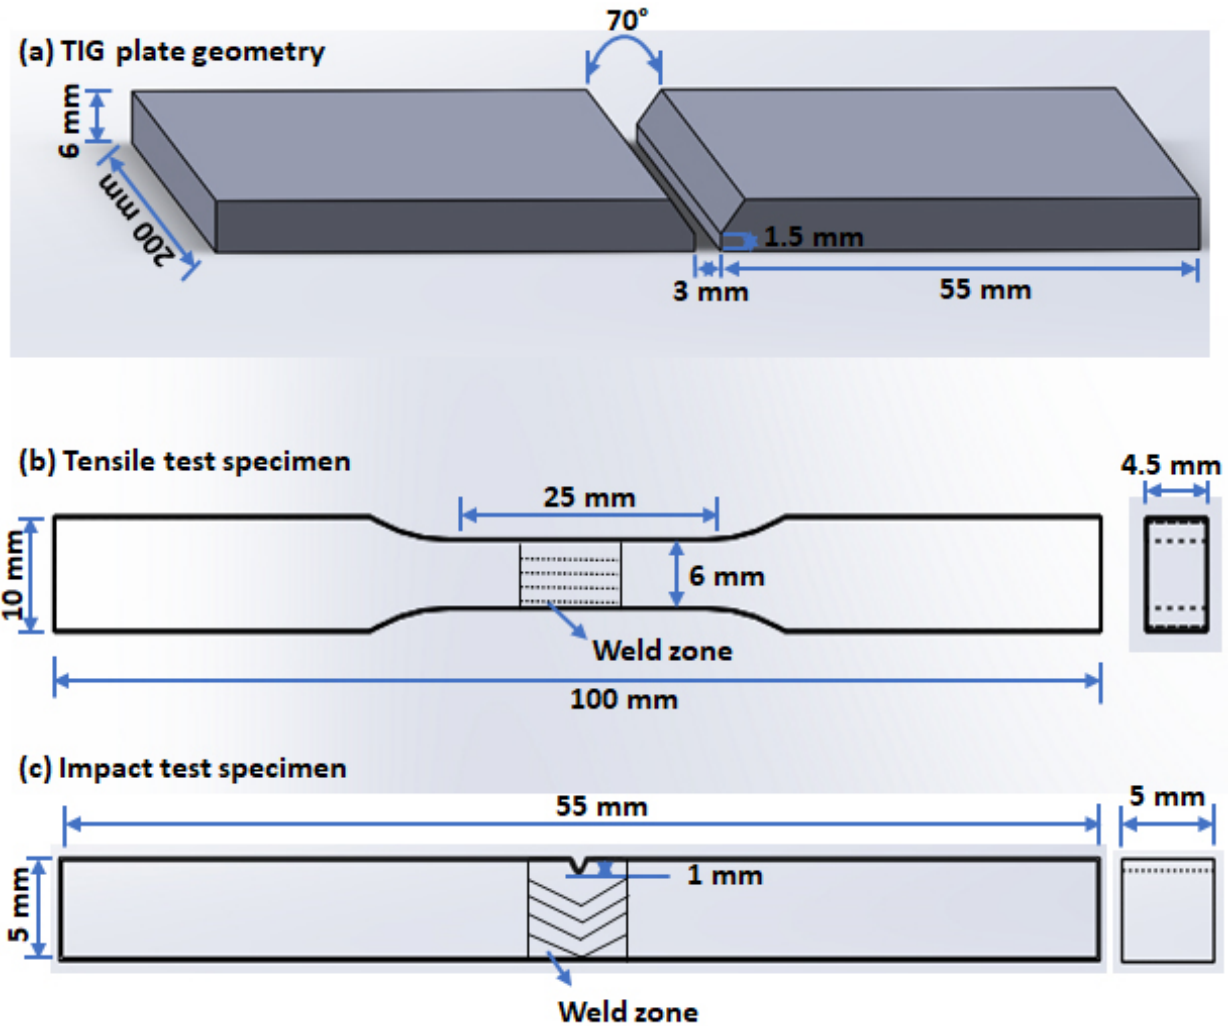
Geometry of (a) AA-6061-T651 plate for TIG welding, (b) tensile test specimen, and (c) impact test specimen.
